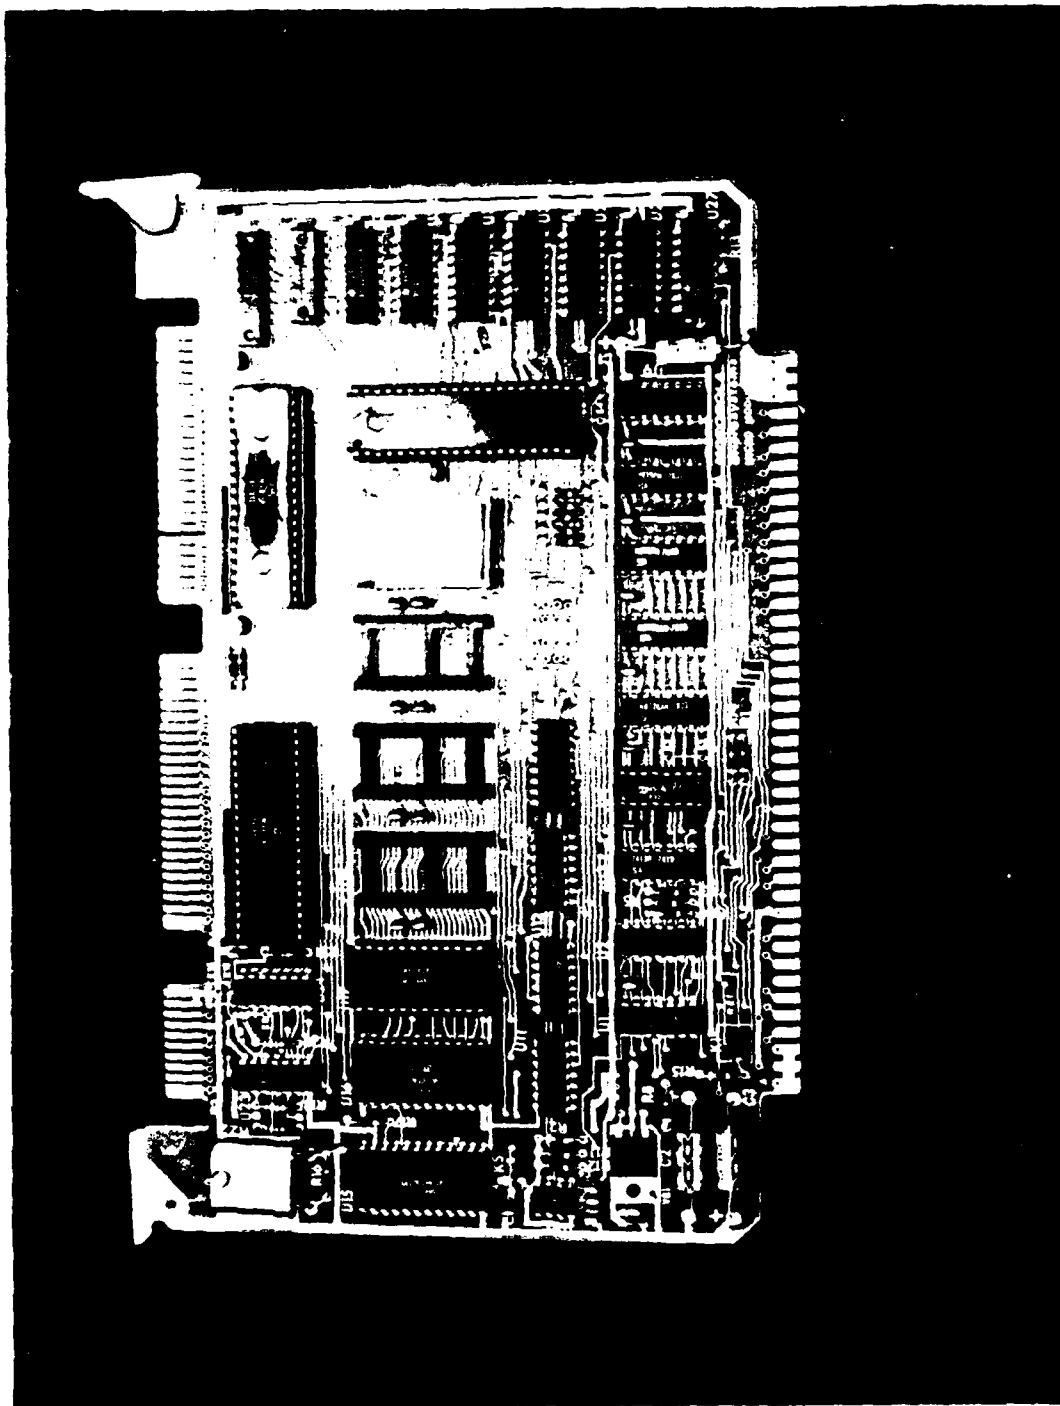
Motorola M68MM01A Microcomputer Monoboard Assembly
